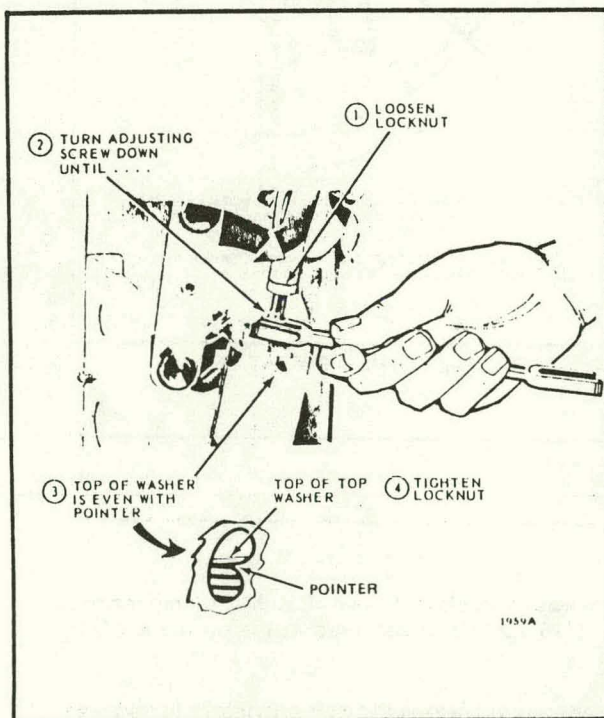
TWO-WAY VALVE ADJUSTMENT.
